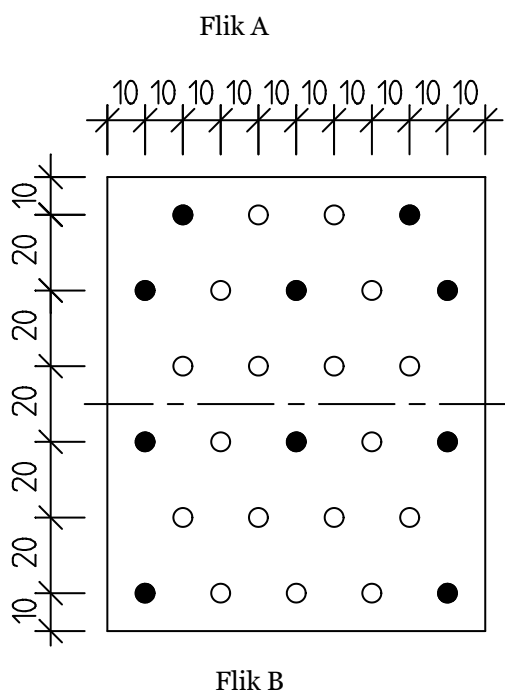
Dimensions of Angle Bracket type 1/60x60x2,0/2,5x100
